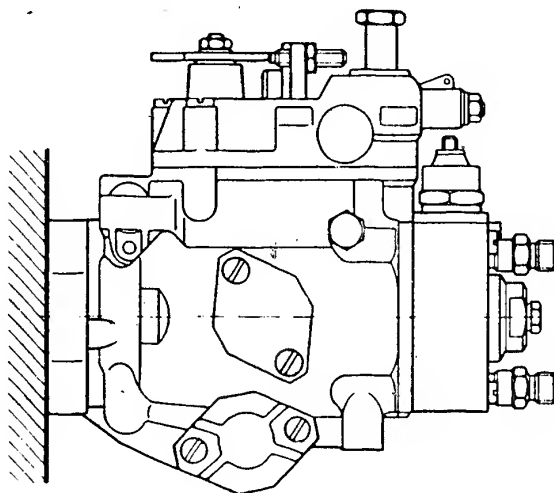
Horizontally installed distributor-type fuel-injection pump
